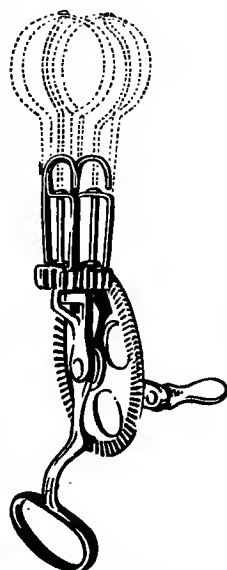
Detail of Egg-Beater Motor Winder shown in Fig. 452.
